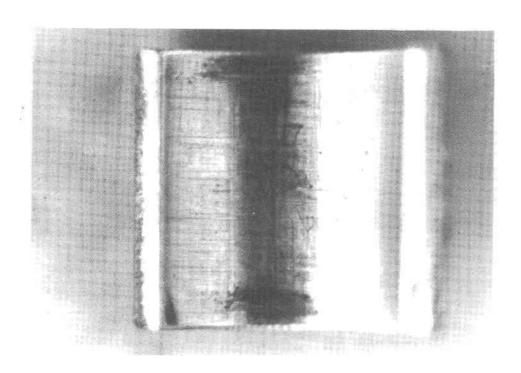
Edge Wear on Tilting Pads, Possibly Caused by Excessive Yaw Motion
